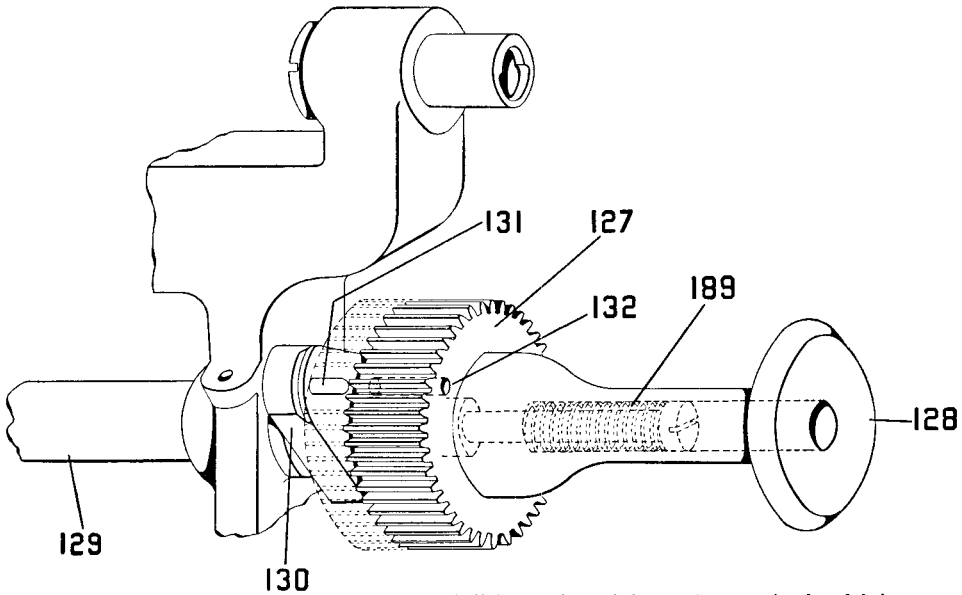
Another diagram of the mold-disk turning pinion 127. 129 is the driving shaft for the mold disk, running from front to rear of the machine. Mounted on the shaft 129 is a sector 130. In this sector 130 is a pin 131. In the mold-disk turning pinion there is a hole passing entirely through it 132. The shaft 129 drives mold-disk pinion 127 through pin 131. When the mold-disk turning pinion 127 is pulled backward by hand, pin 131 is disengaged and the mold disk can be turned by hand. Inside of mold-disk turning pinion 127 there is a spring which urges it toward the rear of the machine and holds it in place when pin 131 is seated in the pinion.
